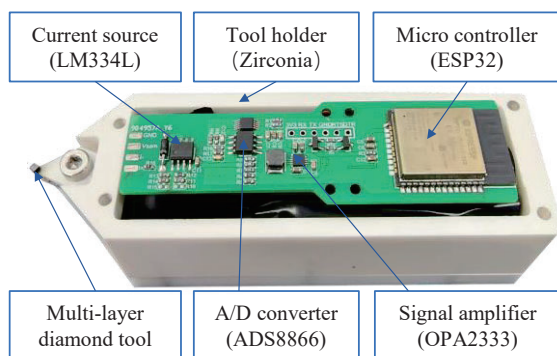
Multi-layer diamond tool setup for cutting temperature measurement
